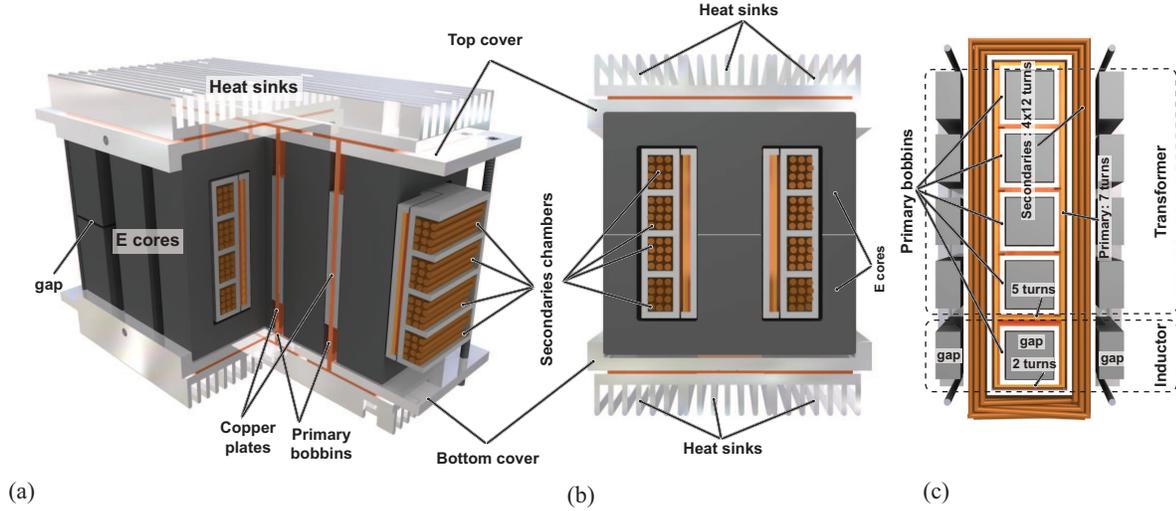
3D CAD Transformer cross sections: a) Quarter section view; b) Half front section view.; c) Half top section view.
